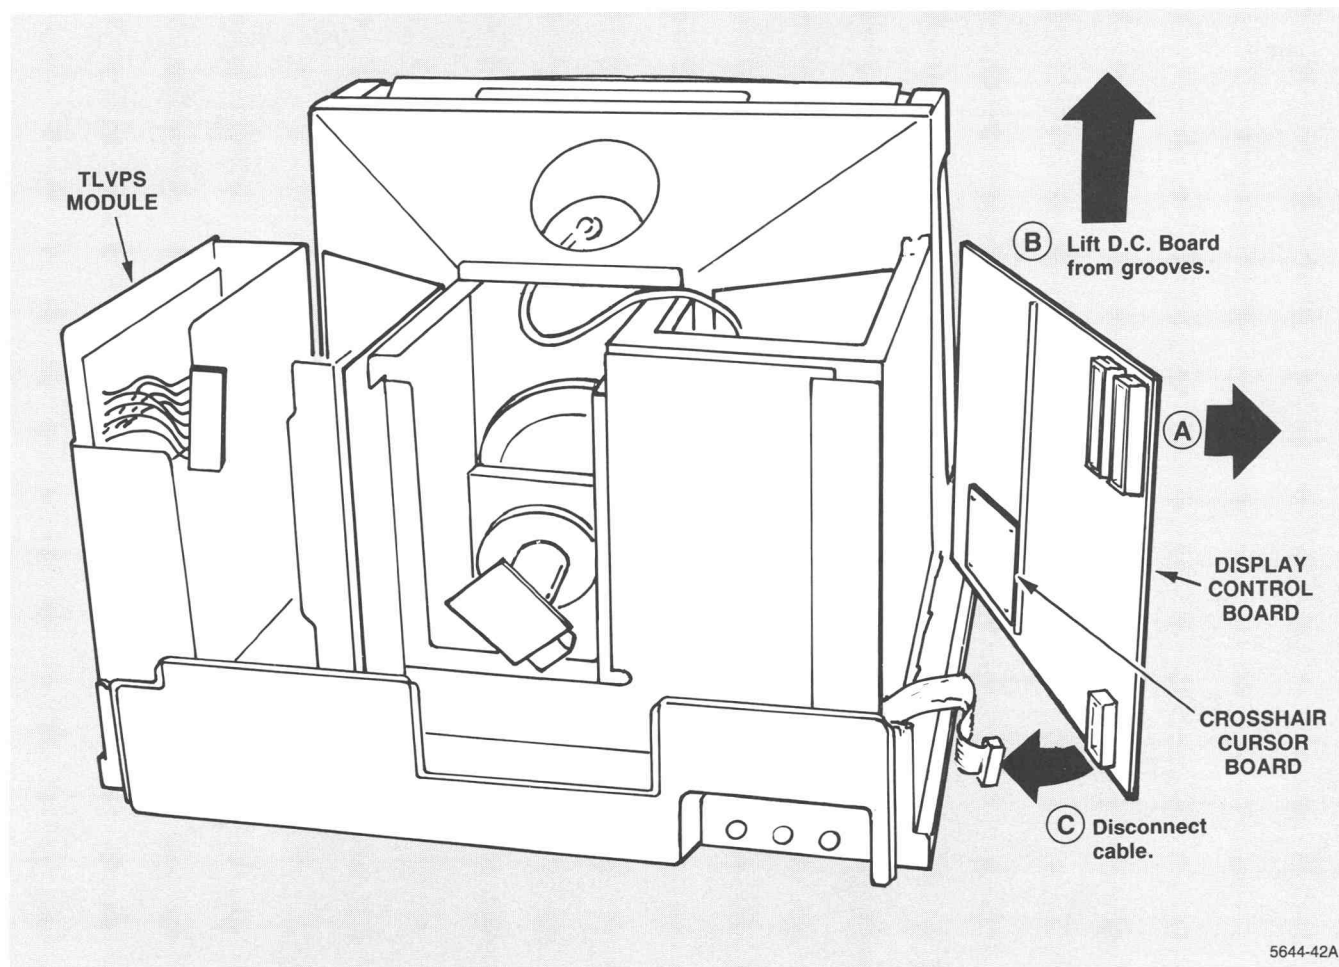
Removal of the Display Control and Crosshair Cursor Boards.
